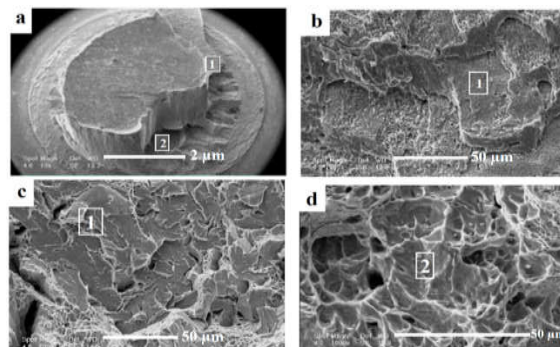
Fracture surface microstructure by SEM of W1, a) fractured weld nugget in the tensile shear test, b) cleavage fracture by rotation in the weld nugget, c) higher magnification, of Fig. 11 b, d) swirled dimples in the width of weld nugget.
